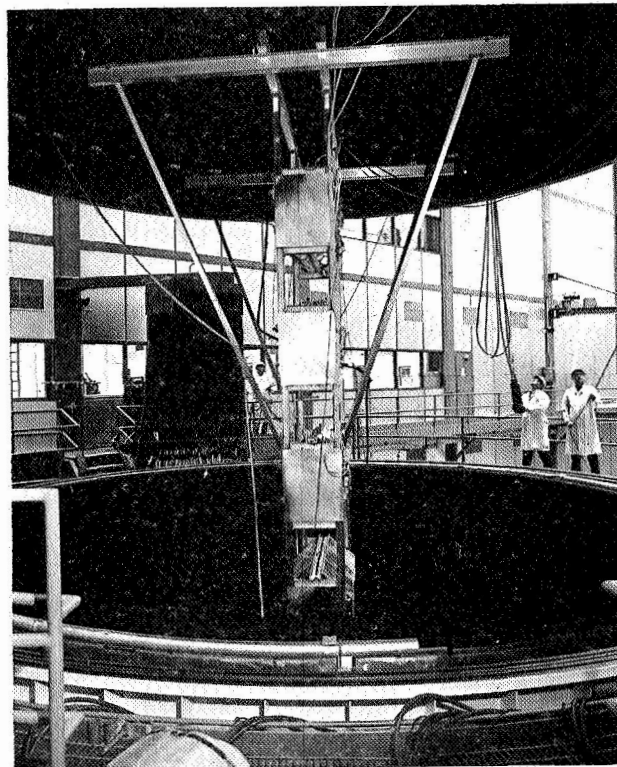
Test Holding Fixture Shown Suspended from Chamber Lid
